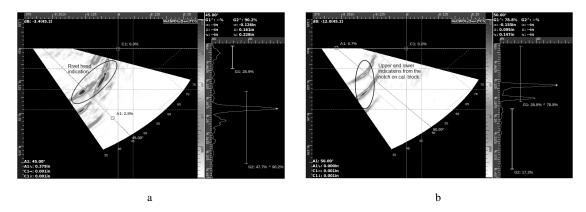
Example of a rivet head indication with no crack (a) and indication from a notch (crack-like indication) (b)
